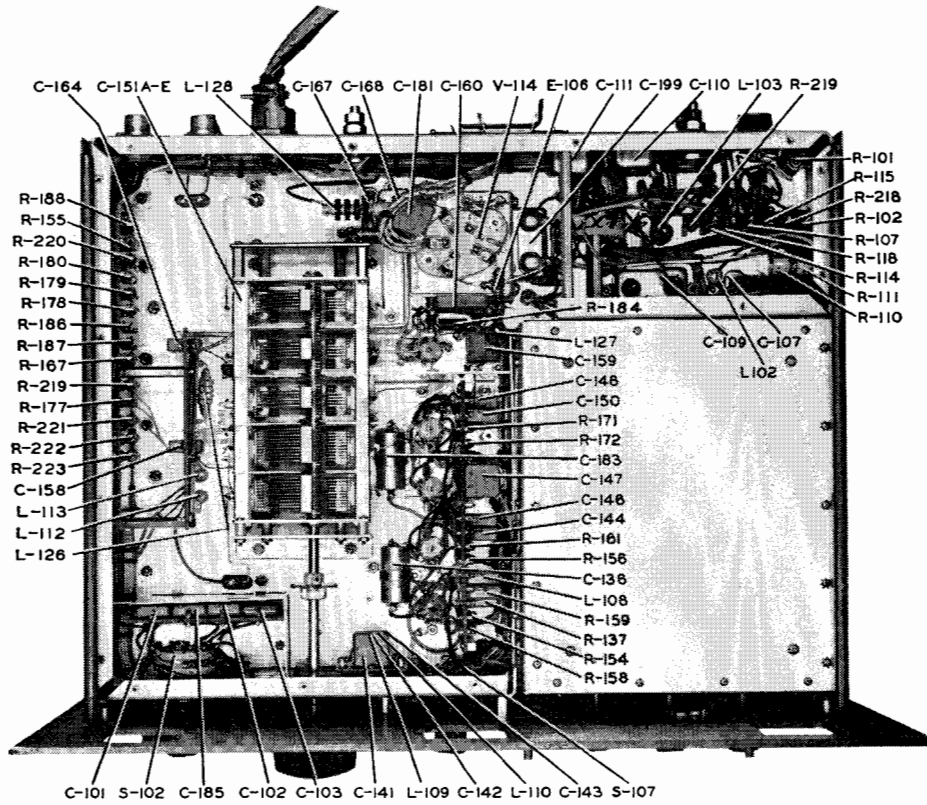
Keyer KY-30/GRT Parts Arrangement, Bottom View
